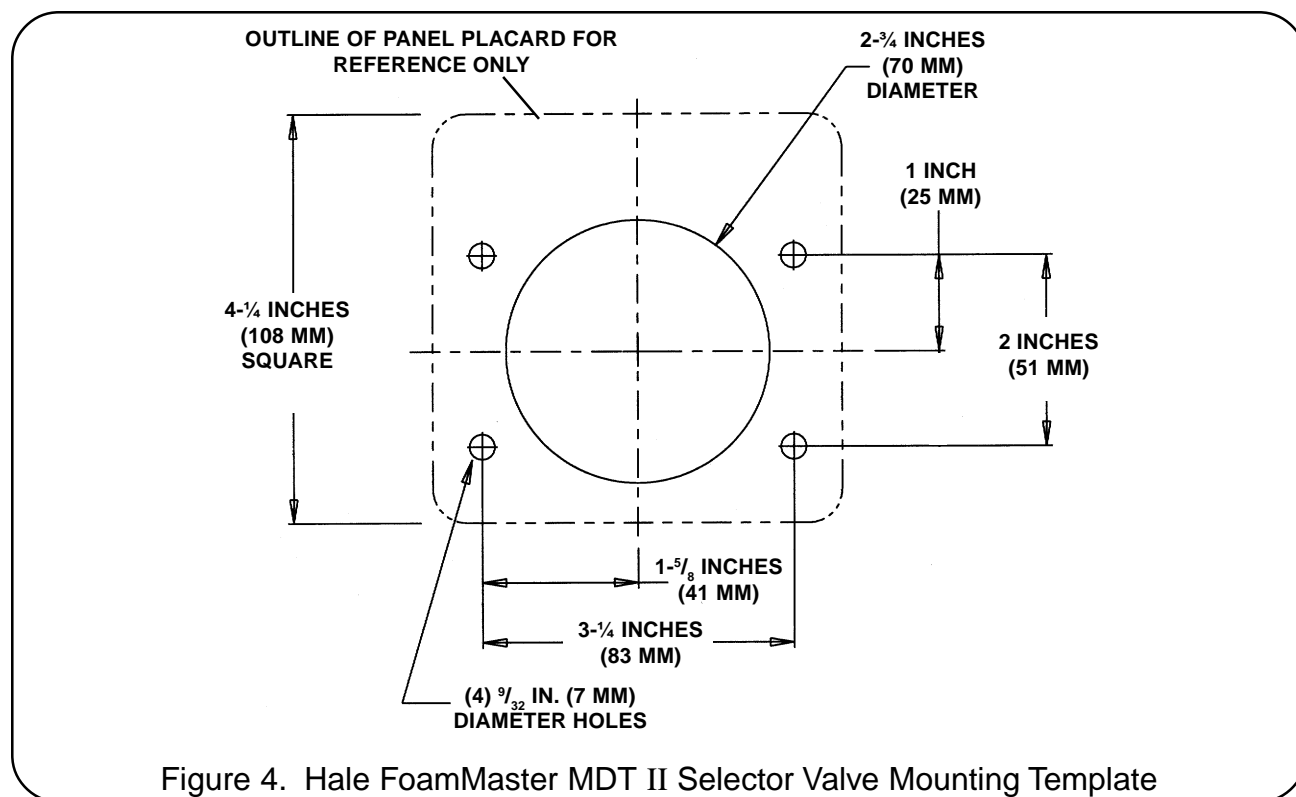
Hale FoamMaster MDT II Selector Valve Mounting Template
